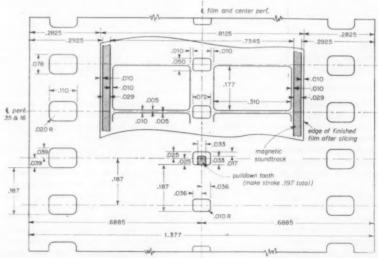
Schematic drawing of dimensions for apertures, soundtrack location and perforation for the cartridge film.
